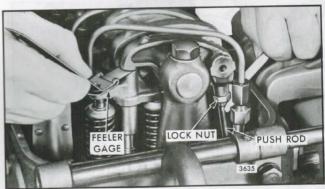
Adjusting Valve Clearance (Unloaded Valve Bridge)
